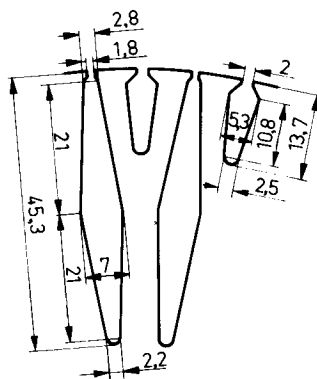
Rotor slot dimensions of the experimental generator (in millimetres).
